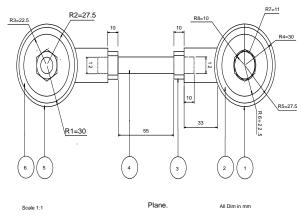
Crank of the cutting device after development(1) Holder bearing-L(2) Bearing ball(3) Nut(4) Connecting rod(5) Holder bearing-R(6) Bearing ball
